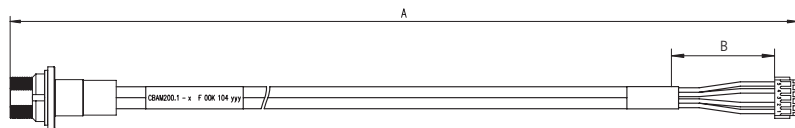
ETK Interface Cable CBAM200-0m38
